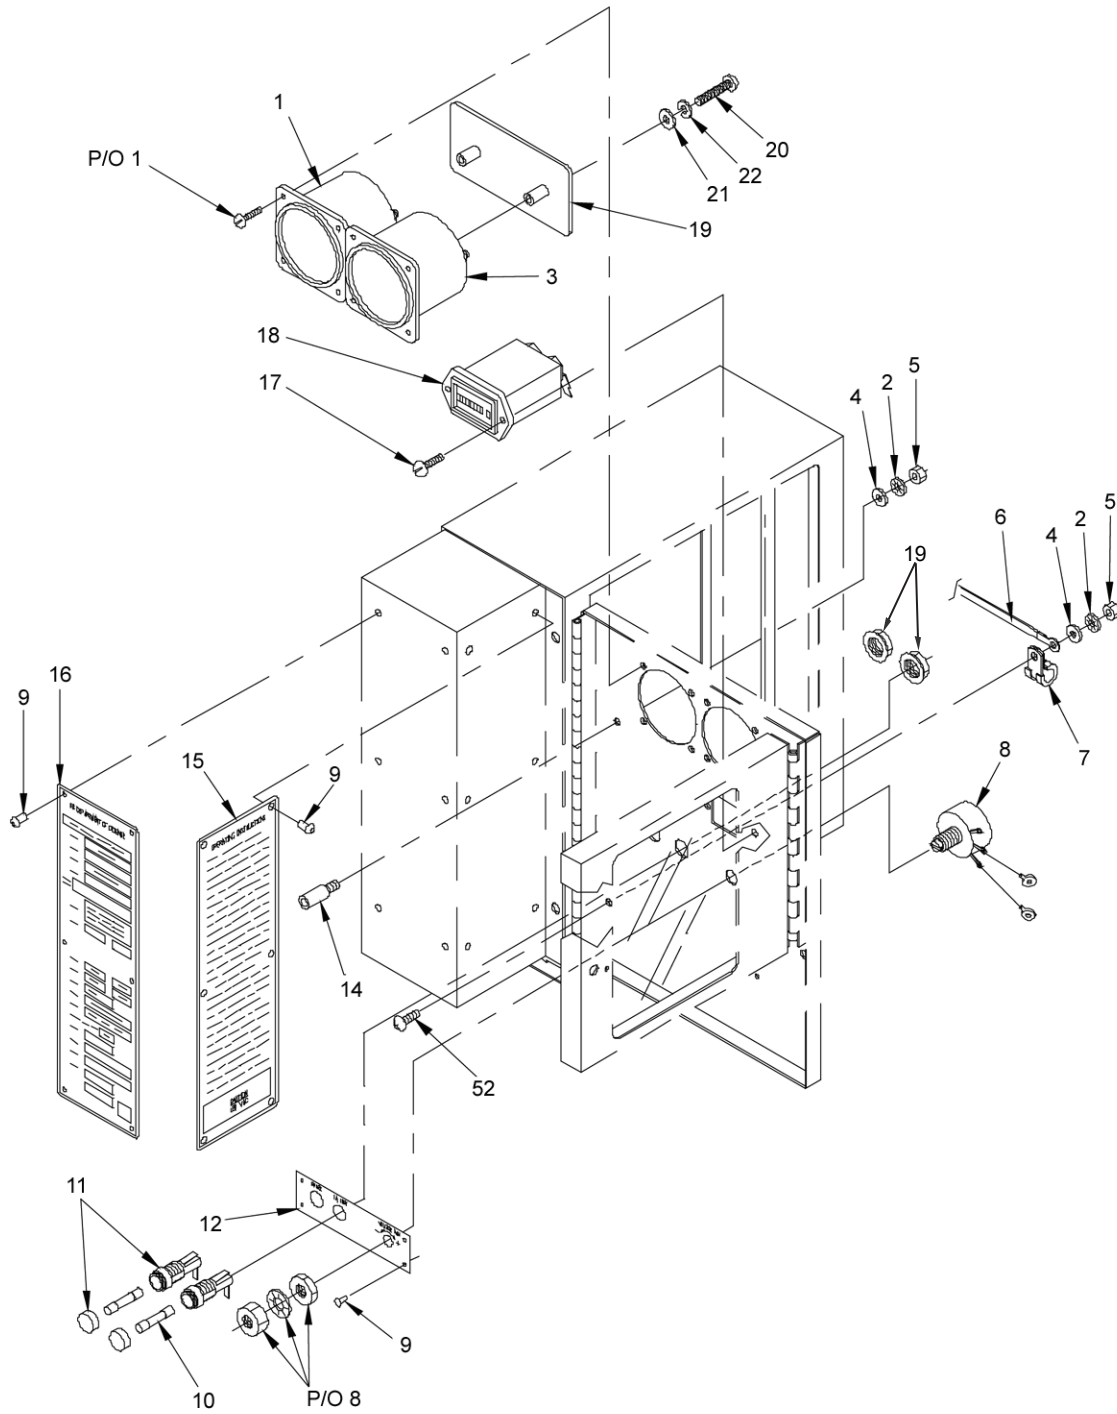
Control Panel Assembly (MEP-501A) (Sheet 1 of 3).
